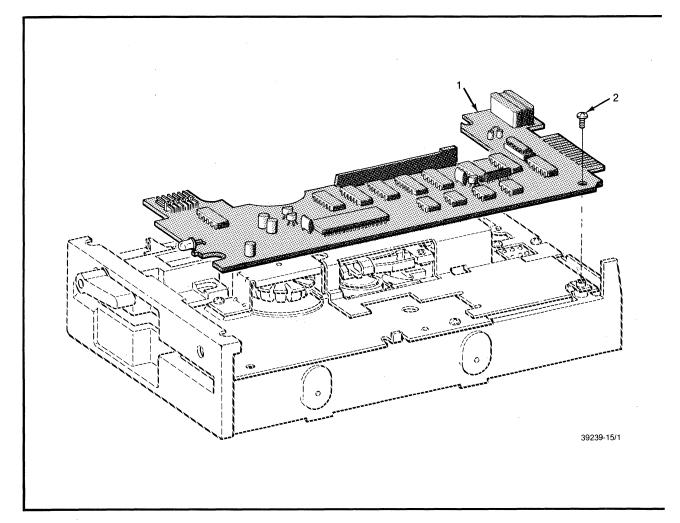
455/465 BASIC DRIVE ASSEMBLY (SHEET 1 OF 4)
